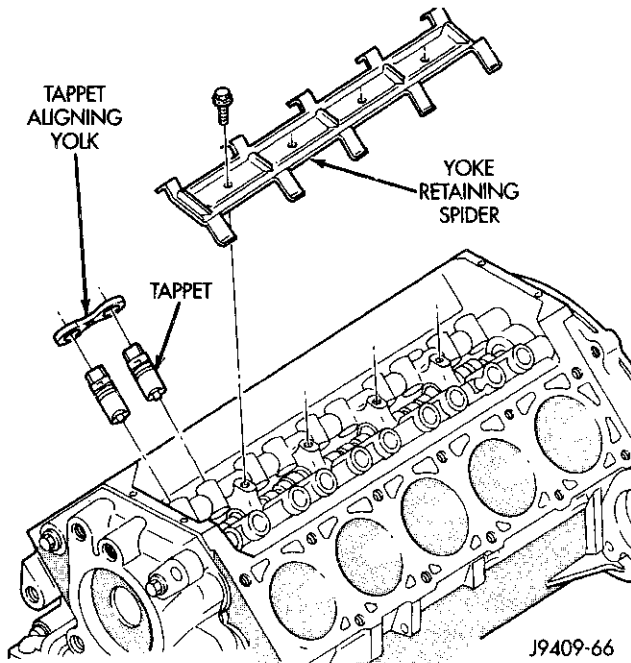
Tappets, Aligning Yoke and Yoke Retaining Spider
